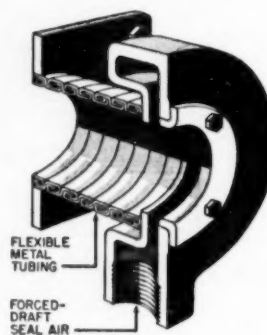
FLEXIBLE METALLIC-TUBING WALL-BOX SEAL FOR FULL-RETRACTING SLAG BLOWER
